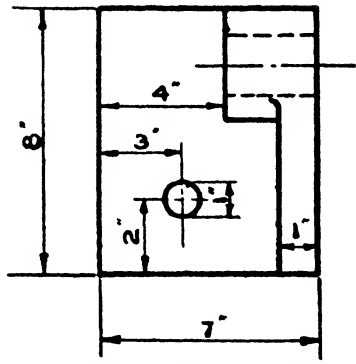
DIMENSIONS PARTLY WITHIN AND PARTLY OUTSIDE THE VIEW
